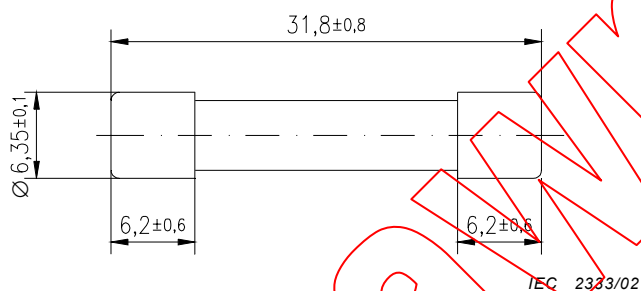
Test fuse-base for 5 mm x 20 mm and 6,3 mm x 32 mm fuse-links –
